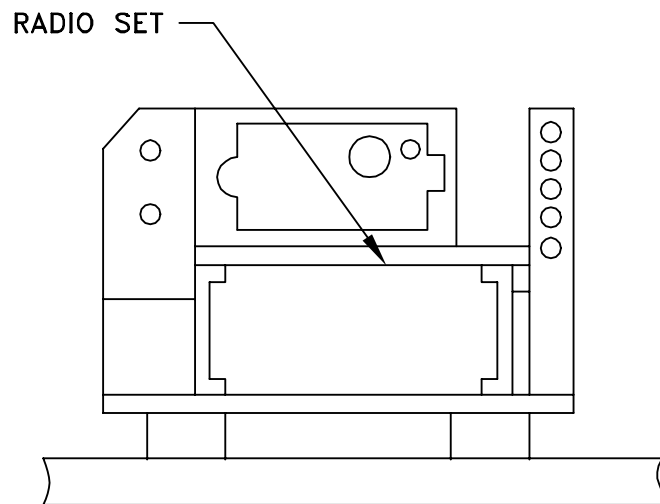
(2). MK and Radio Installation: Radio Equipment Location
